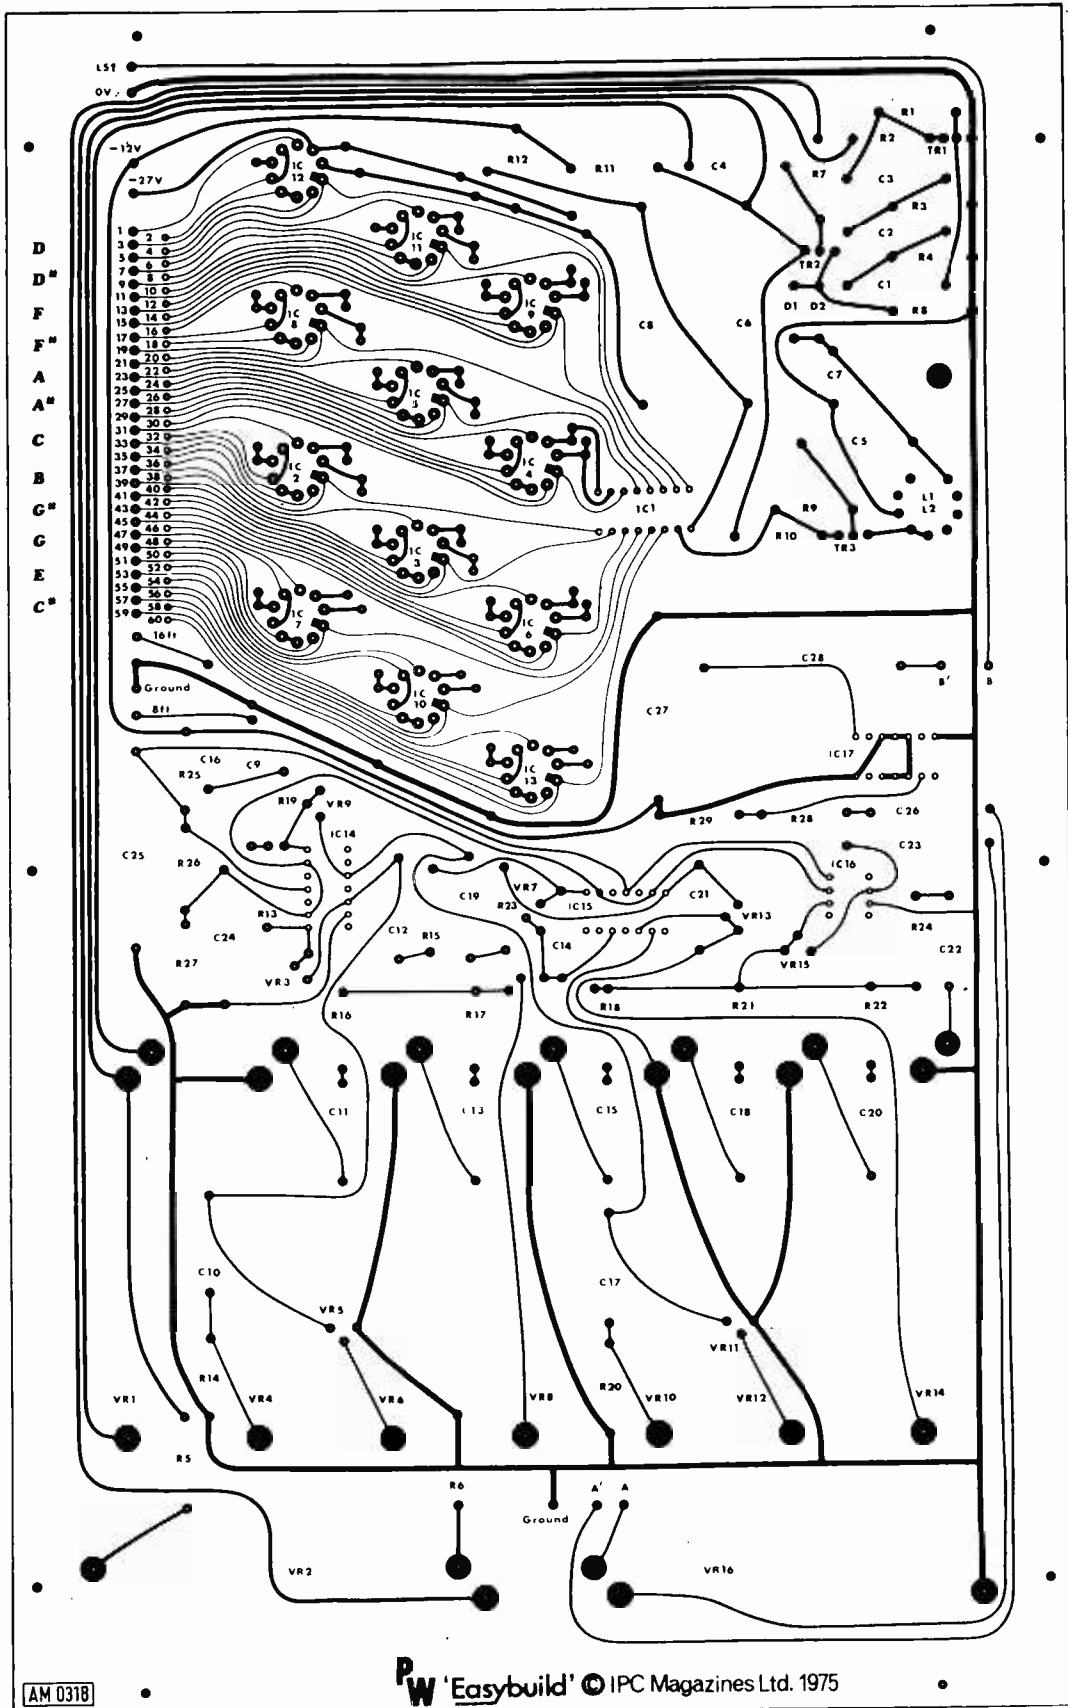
Above, shows the main PCB layout, for reference purposes only. This is NOT ACTUAL SIZE. The board size is 330 x 205 mm (13 x 8in.). Details on obtaining a full-size paper drawing of the PCB can be found in Part 1. The annotated photograph, facing page, is of the finished board, which will assist constructors to locate the components. The copper side of the board is underneath.
